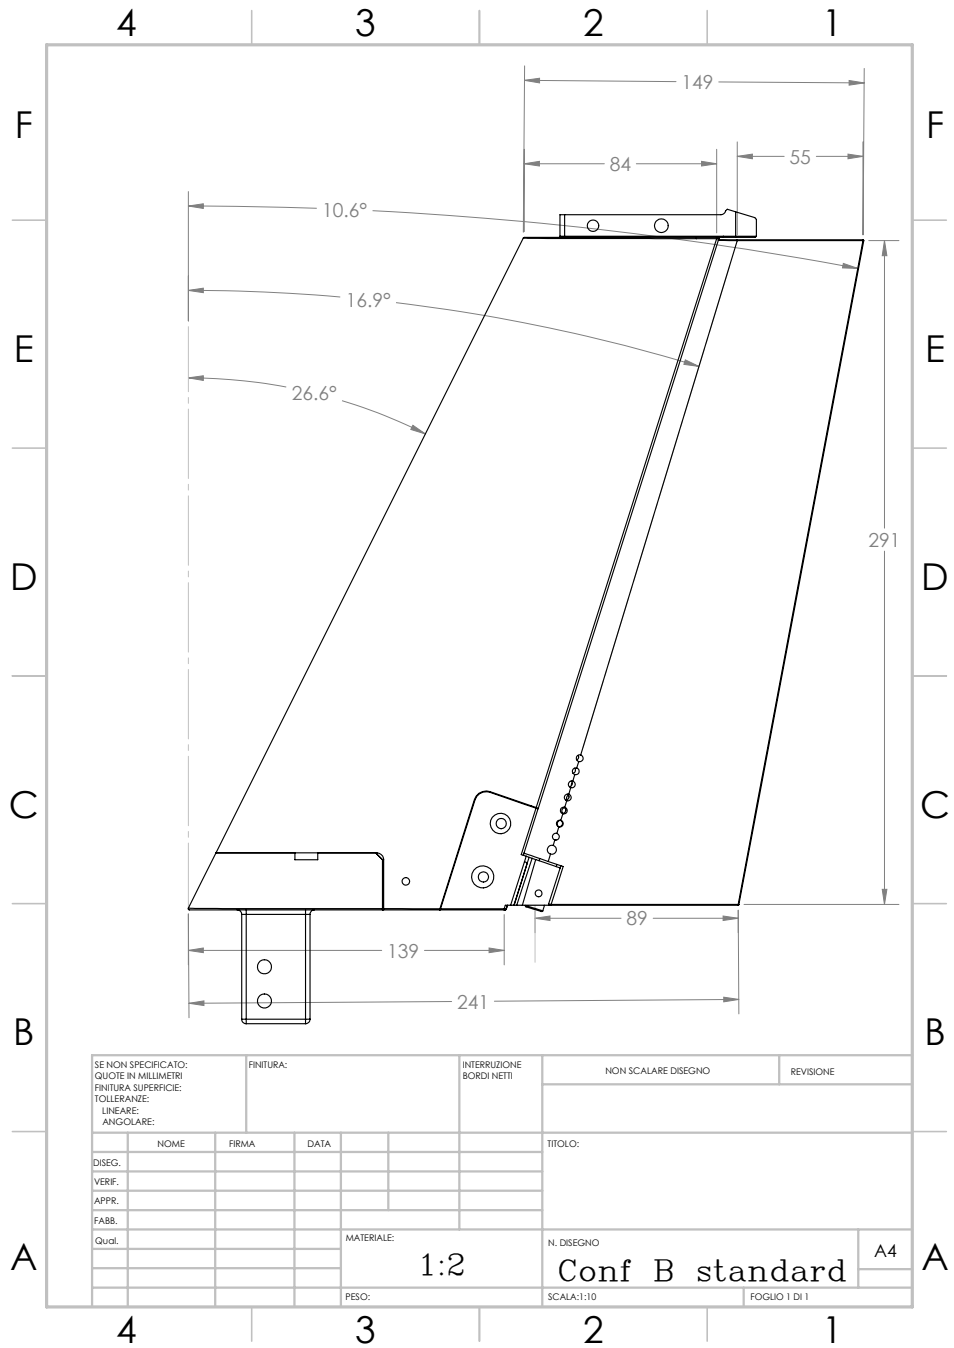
CAD model of tail assembly B with $R = 1.5$.
